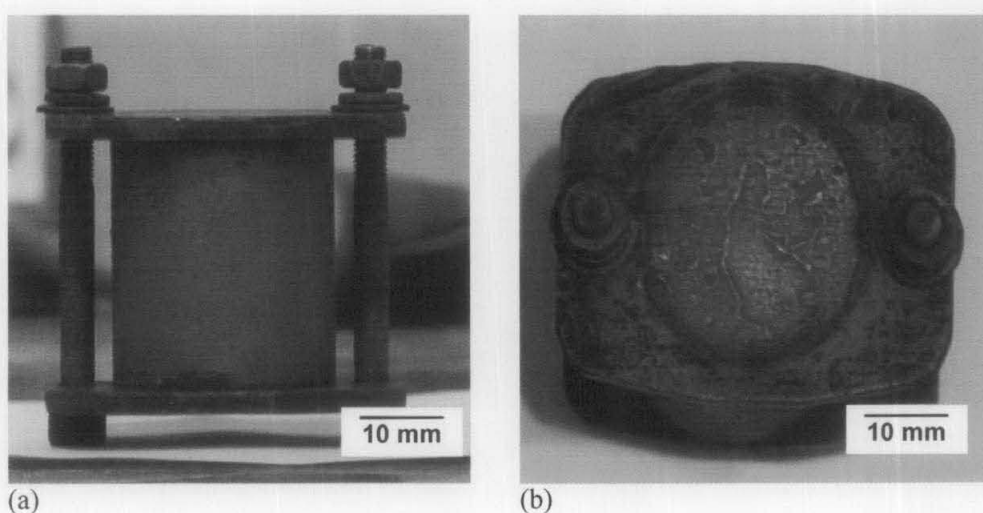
Foaming Die (a)Side view (b)Plan View
